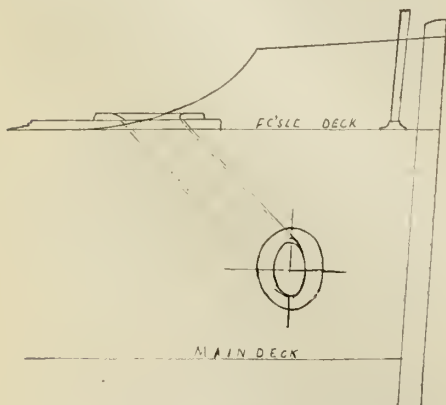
SHOWS STARBOARD SECTION VIEW.
